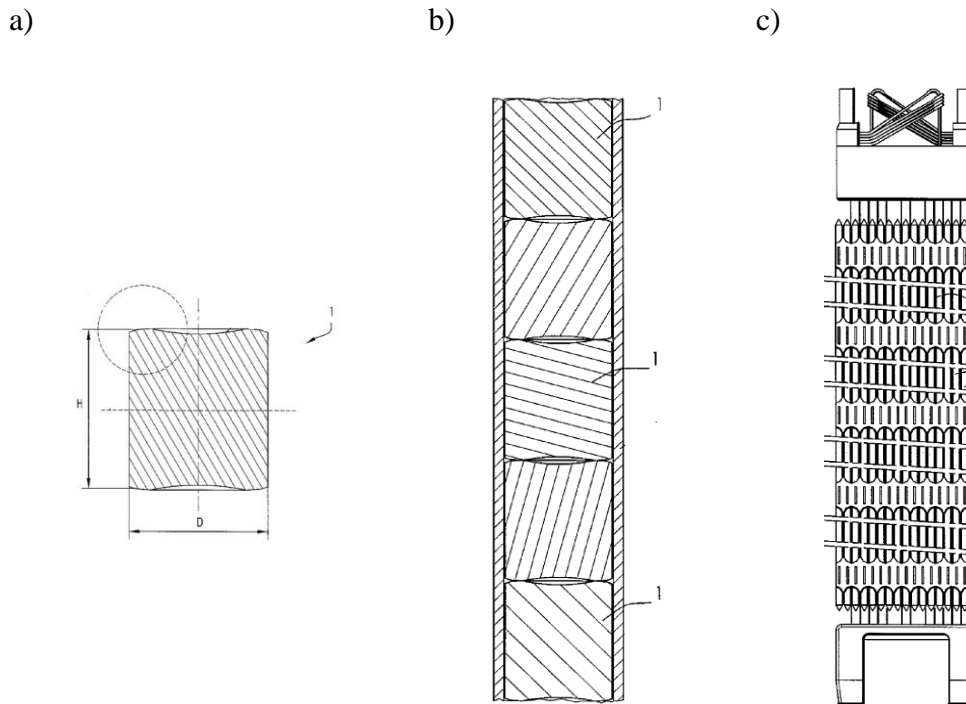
Schematic view of a) double dish chamfered fuel pellet, b) nuclear fuel element, and c) nuclear fuel assembly. (From [11].)
